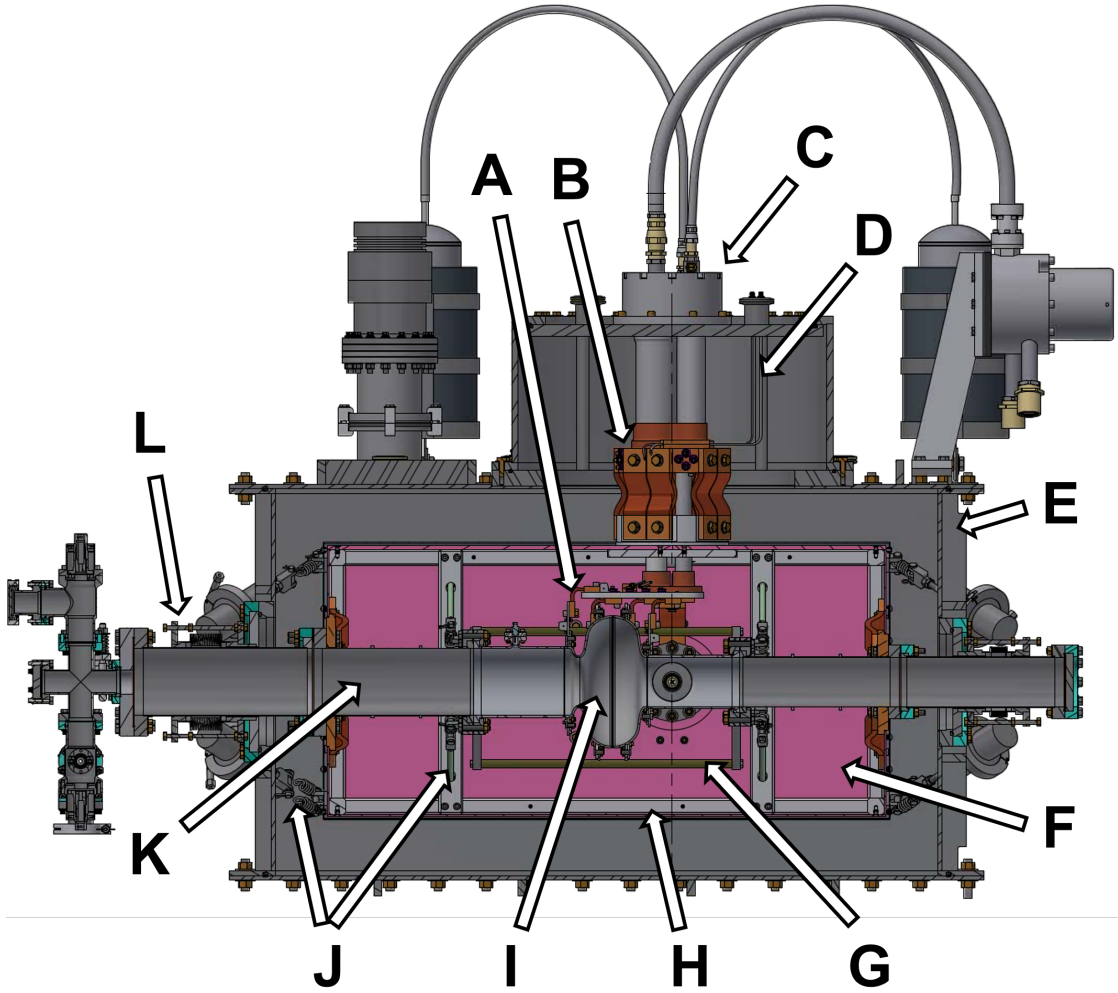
CAD model of the final cryomodule design highlighting the following components (clockwise from above): (A) 4.2 K thermal link, (B) 45 K thermal link, (C) cryocooler cold head assembly, (D) RF cables (forward/reverse and transmitted), (E) vacuum vessel, (F) thermal and magnetic shielding, (G) titanium support rods, (H) aluminum support frame, (I) cavity LCC1-1, (J) G10 support rod assemblies, (K) thin transitional beam tubes, (L) beam tube bellows. Many of these components are discussed and shown in further detail in the rest of this section. The design of LCC1-1 and the 4.2 K thermal link was discussed in section 5.2. The forward power couplers discussed in section 5.3 are not shown in this view, but are connected to the cavity's RF coupler ports.
